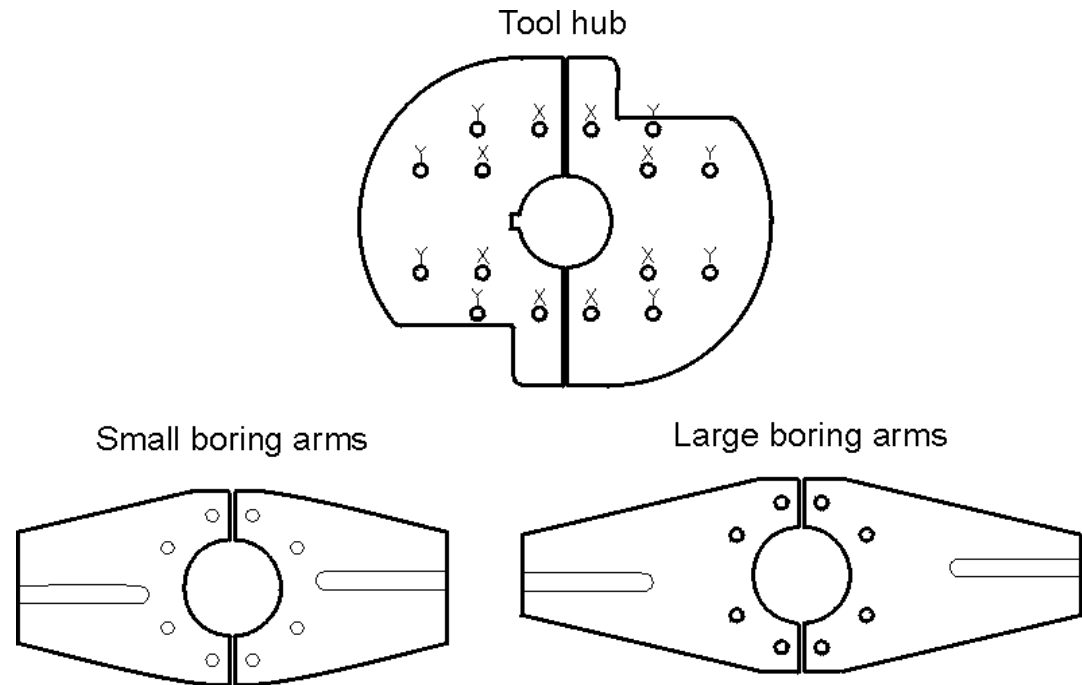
MOUNTING BORING ARMS TO TOOL HUB
